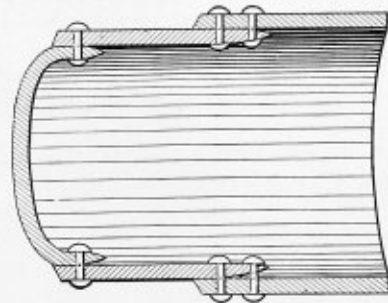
Edges of Plate Worn, Exposing Rivet Stems
